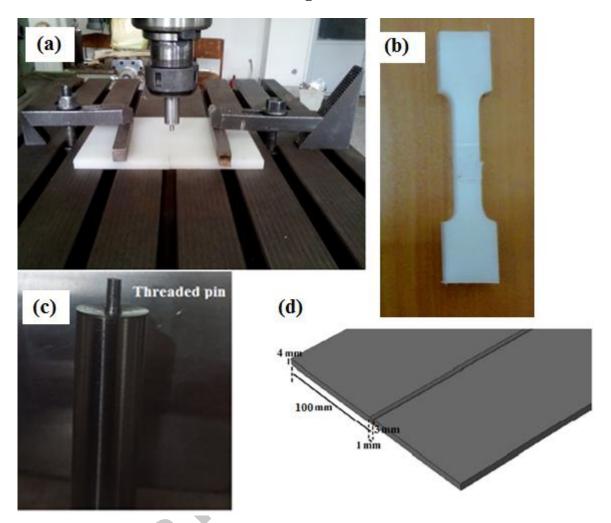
(a) Experimental setup including FSW attachment on milling machine, clamping system, (b) sample cut from the joint for tensile test (c) threaded pin tool (d) schematic illustration of grooved sheets for filling by nanosilica addition
